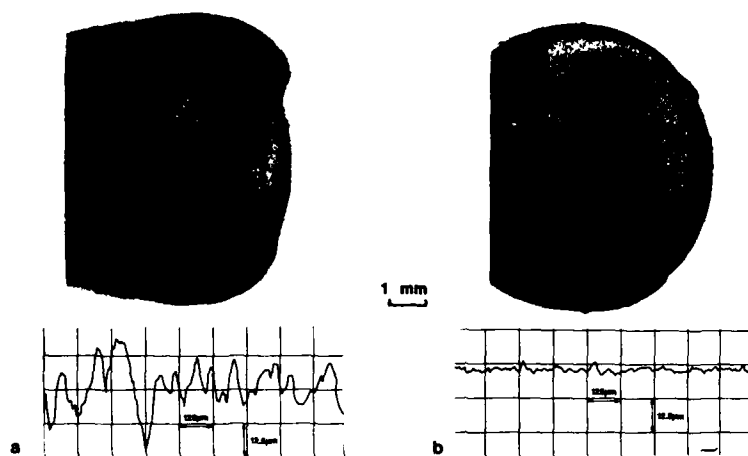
Izod impact fractures (x8.6) and fracture surface roughness for test pieces machined from a diffusion bonded stack of 16 Ti-6Al-4V sheets.
